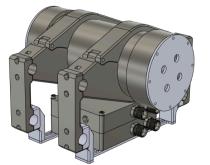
CAD of our custom battery and ESC mounting system. The top is the battery ABS to be able to withstand outdoor use and enclosure, the bottom is the ESC enclosure
